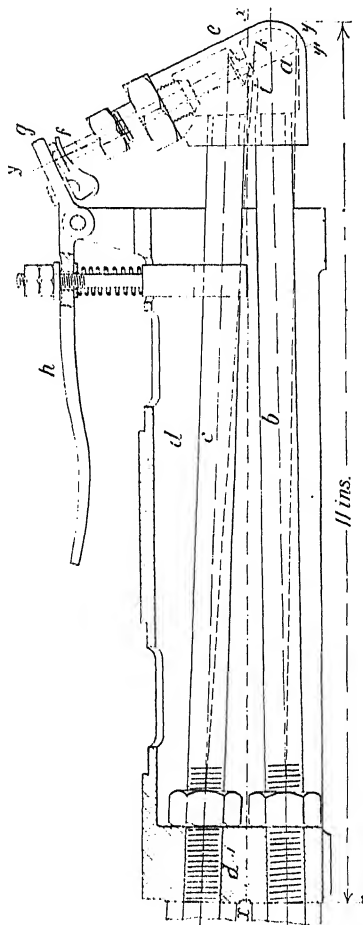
Geipel's Improved Trap, with Inclined Valve Spindle to Prevent Side Pressure
